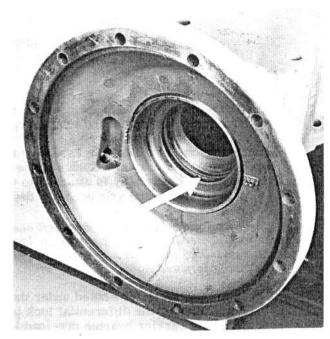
Oil Seal Drain Hole Location (Wide Ring Type Only)
